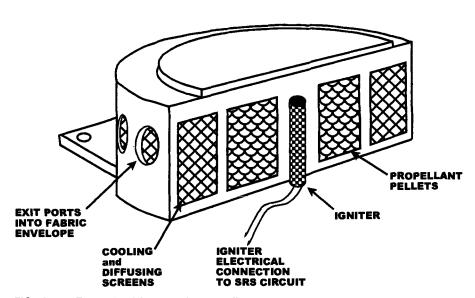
Example driver air bag squib showing canister, filtering and cooling screens, propellant, and igniter.
